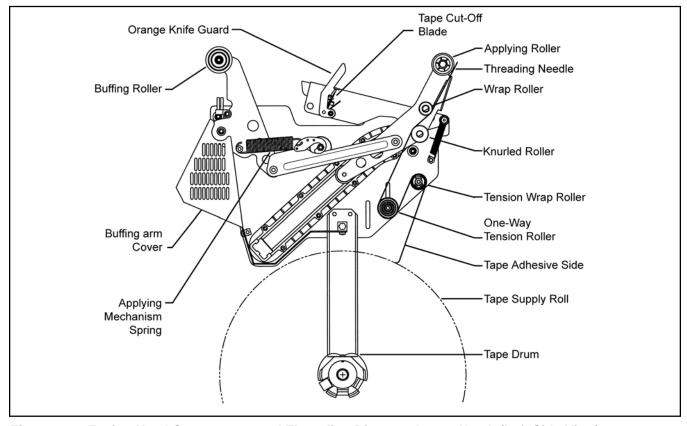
Taping Head Components and Threading Diagram, Lower Head (Left Side View)
